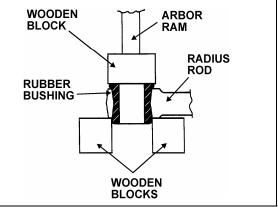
RADIUS ROD BUSHING INSTALLATION 16012
